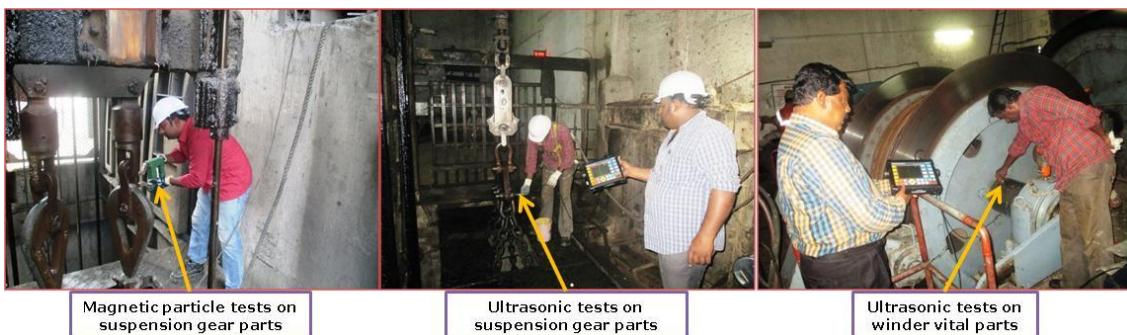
NDT on winder vital components & suspension gear parts, Rajpura Dariba Mines, M/s HZL
